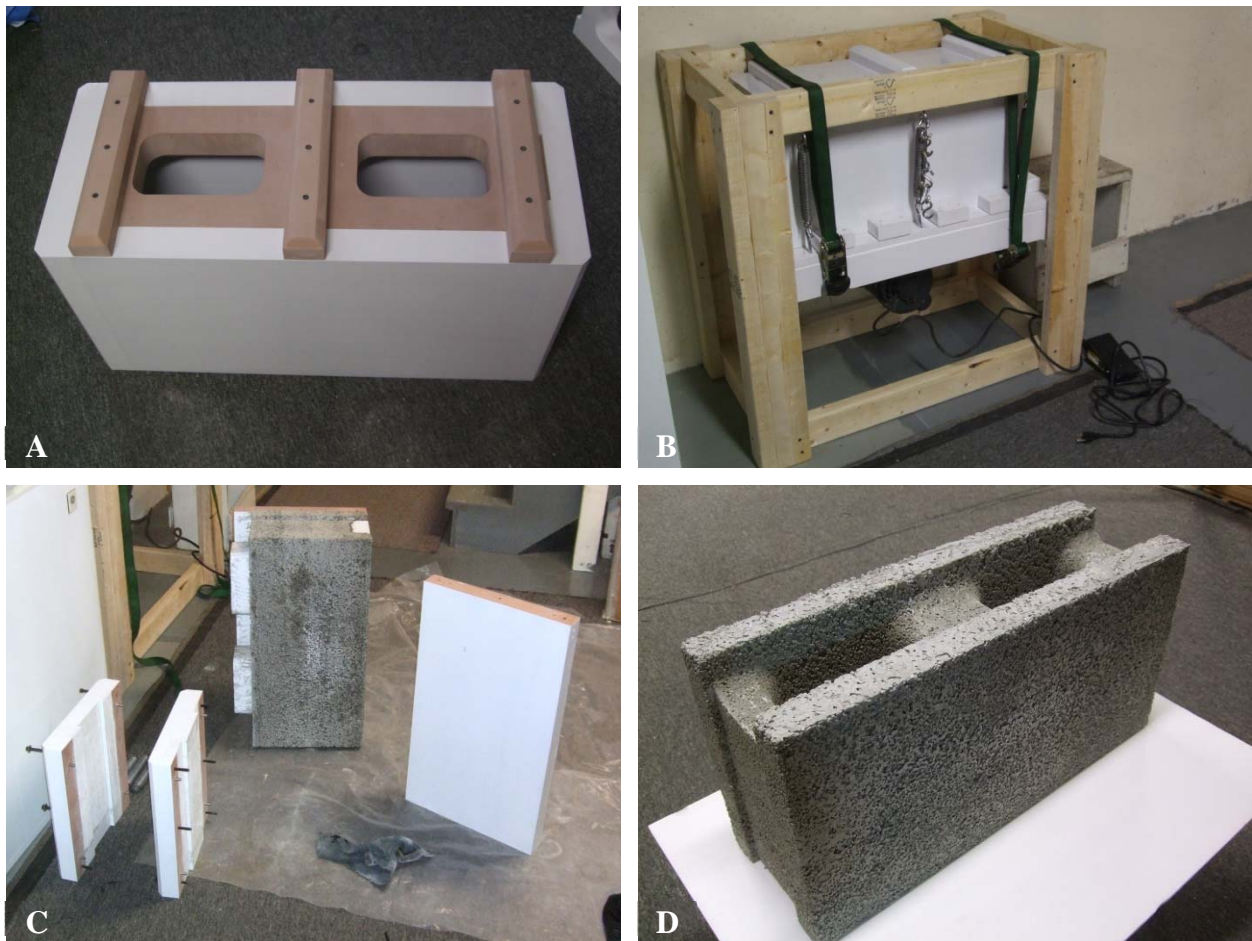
Various stages of block production. (a) nearly completed mold with unpainted shoe section; (b) mold loaded on vibrating table; (c) mold disassembled to remove completed block; (d) block shortly after removal from mold.
